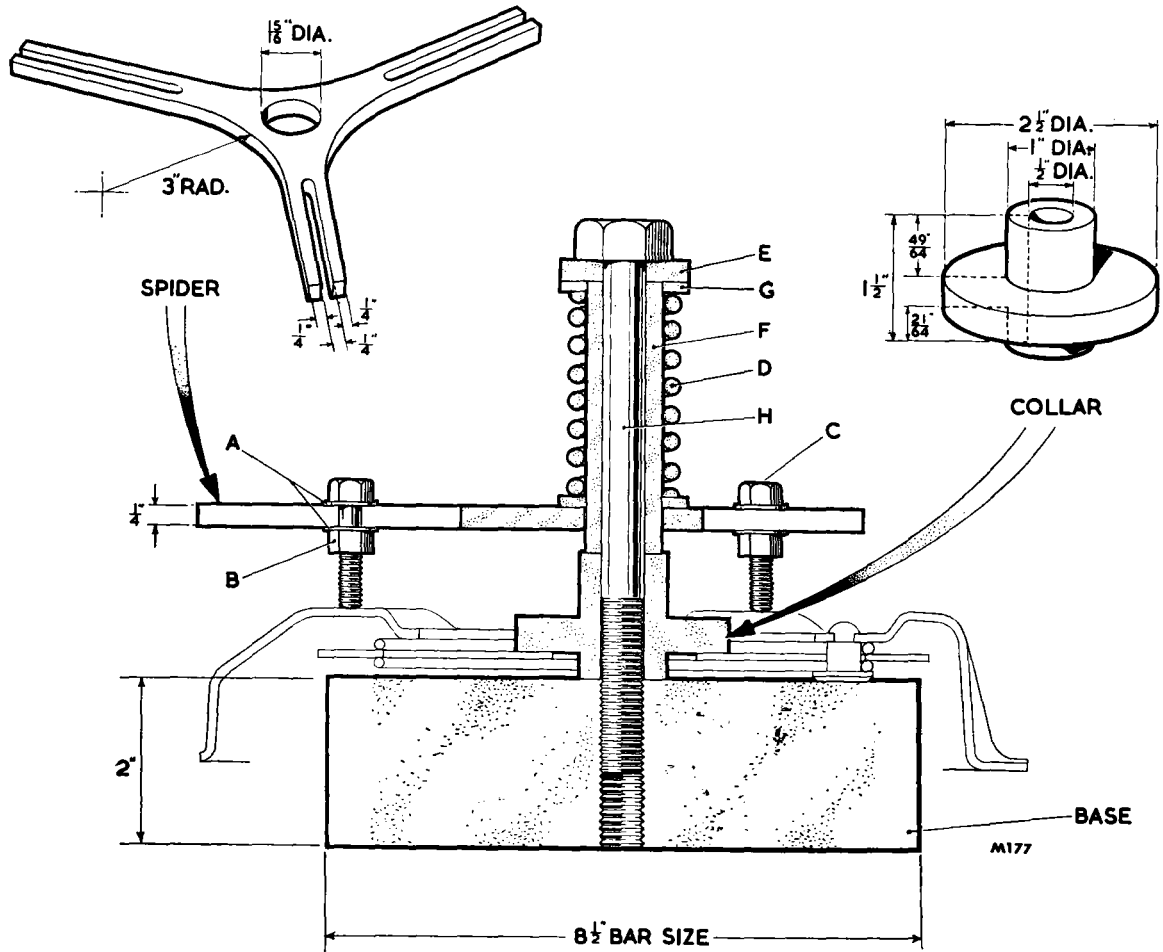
Dimensions of special tool for compressing the diaphragm spring when riveting the spring to cover pressing.
